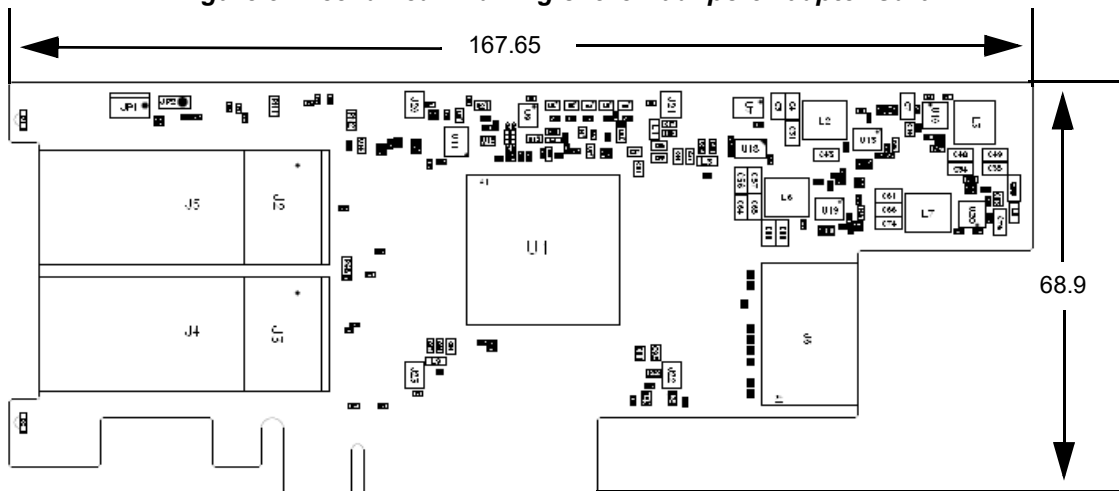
Mechanical Drawing of the Auxiliary PCIe Connection Card
